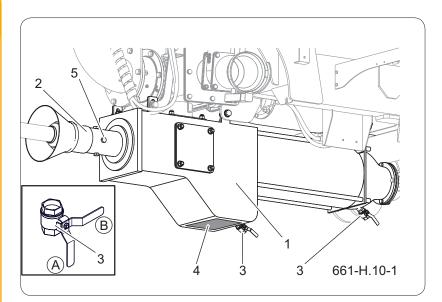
Feed pump (1) discharge chamber (3) valve (5) inspection plugs (B) closed position
